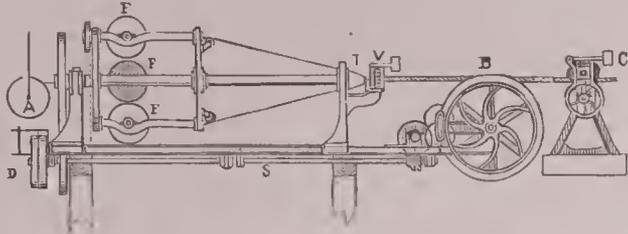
Wire rope: A, heart; B, draw-off drum; C, friction-drum; D, driving-pulley; F, bobbins; T, top; V, tube; S, driving-shaft.
